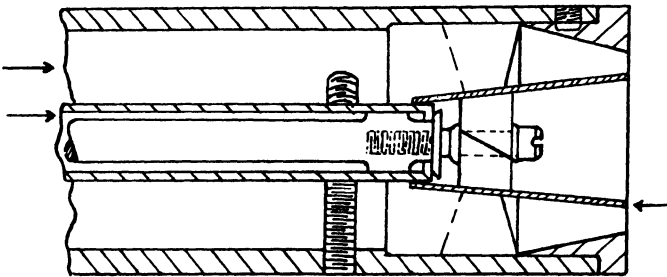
“ Parwinac ” Industrial Oil Burner.
